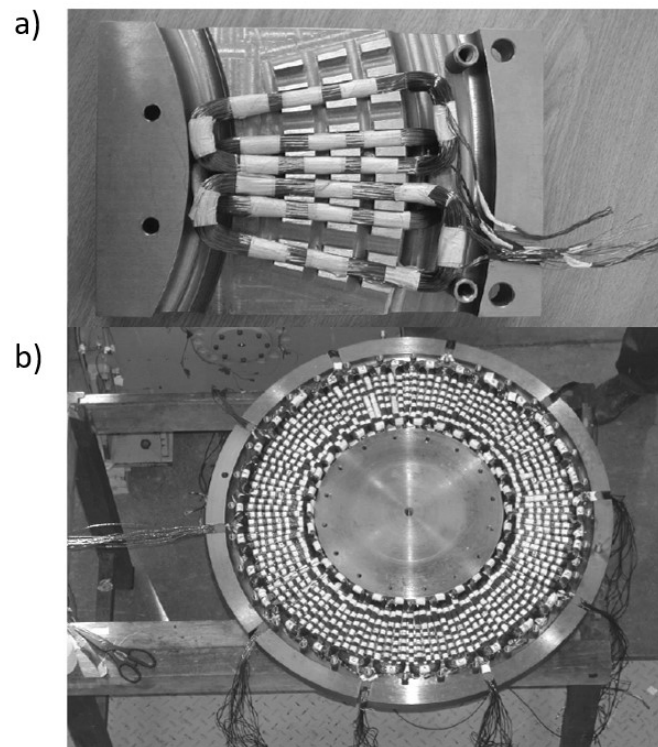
Devices for correctly placing the coils into position within the moulds are available in two forms: (a) A mould equipped with guide slots. (b) A mould designed with guide pins. Source: [61]
